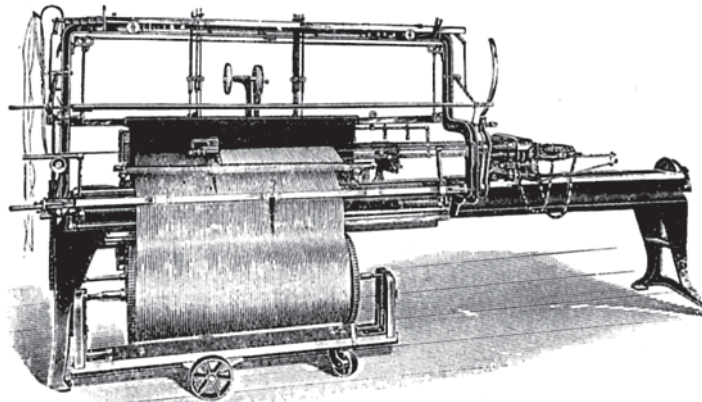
AUTOMATIC WARP DRAWING-IN MACHINE.
